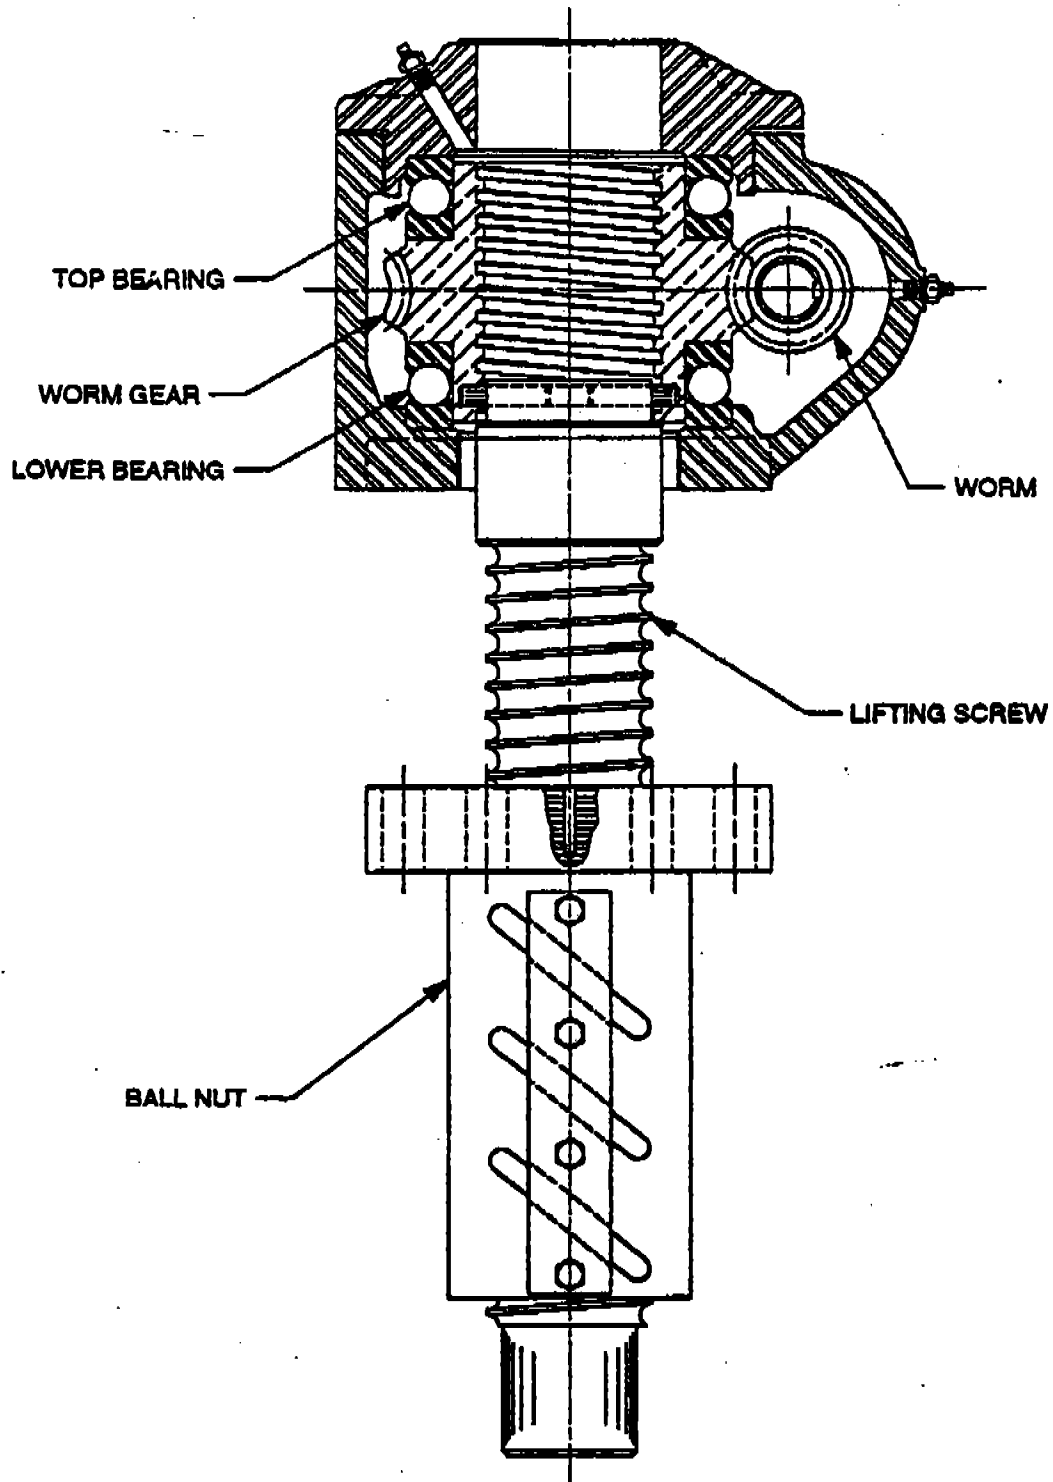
BALL SCREW ACTUATOR (ROTATING SCREW TYPE), UPPER CROSSHEAD - 53
